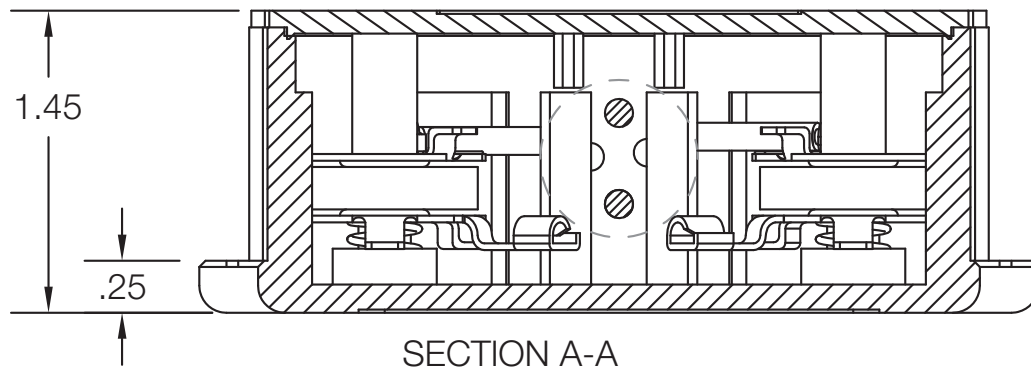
MOV Storm Trapper surge arrester sideview cutaway with dimensions.
